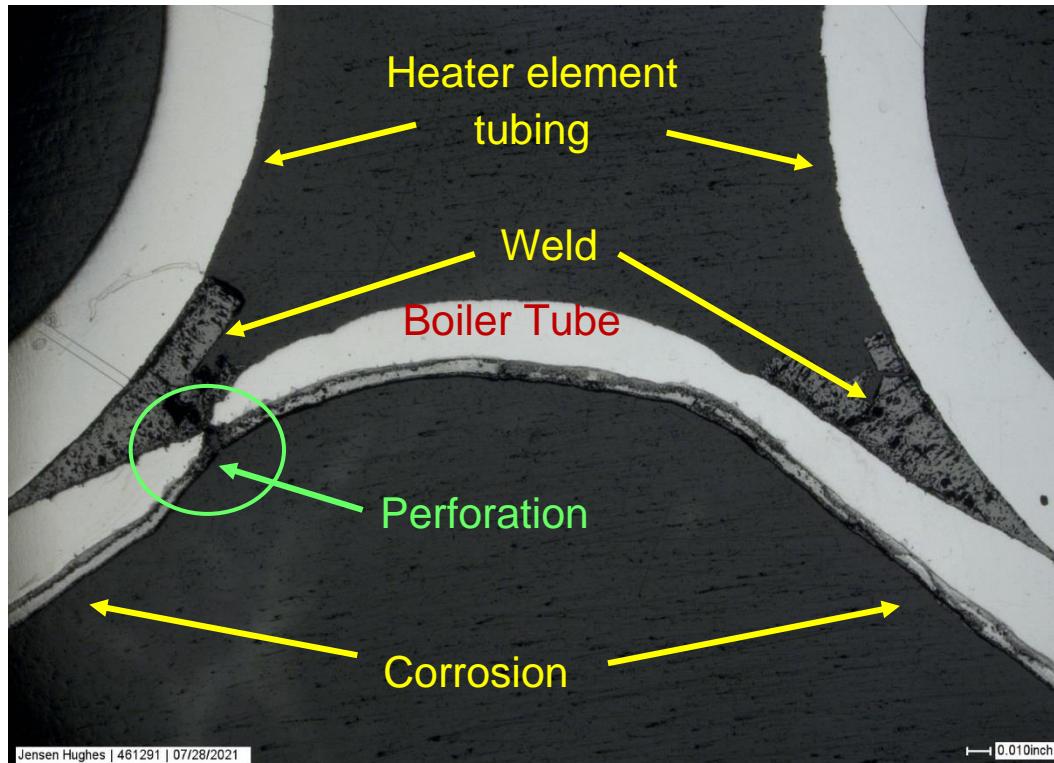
Item #1.05.03, optical micrograph of the mounted boiler tube section. The perforation shown in green lettering allowed flammable refrigerant to escape into the motorhome.
